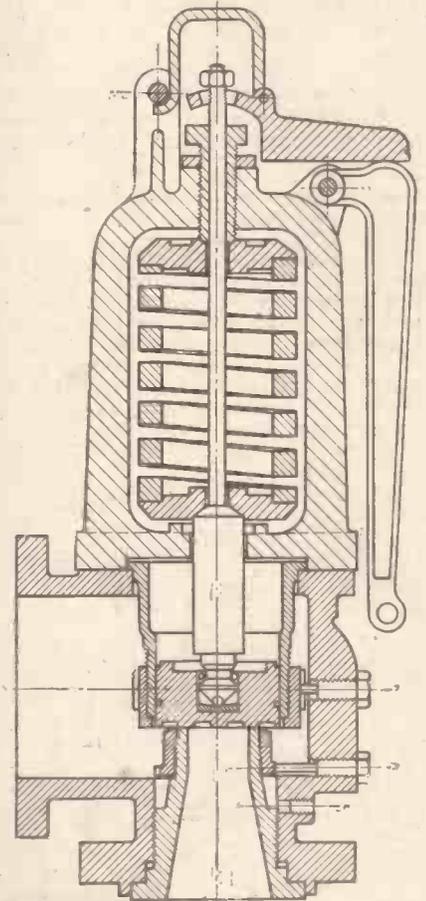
"Pop" safety valve (Crosby Valve & Engineering Co.).
